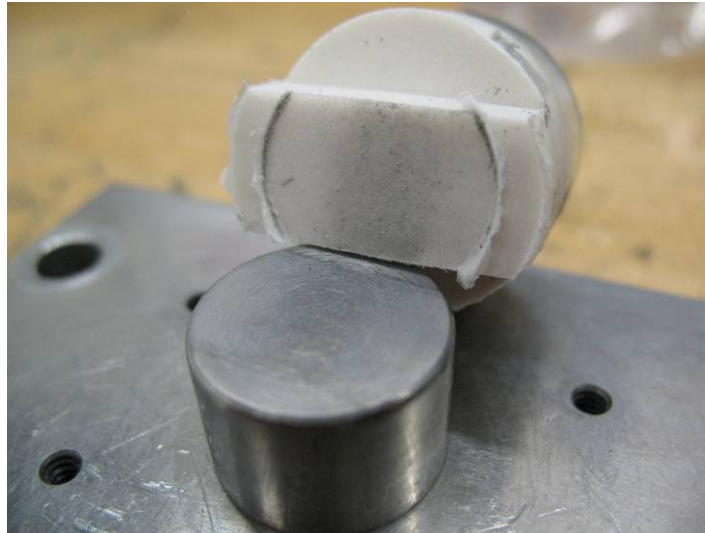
Polymer tool showing molding flash line and matching  $\mu$ machined sample
